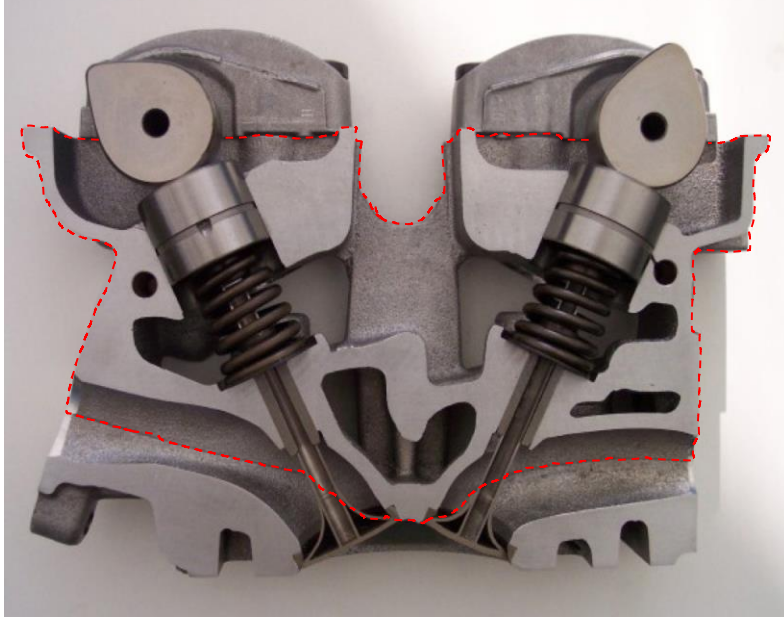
A representative cross section of a cylinder head (outlined in red) showing the complex geometries used to transport coolant, fuel, and hot exhaust gas through the engine. Photograph reproduced from [9].
